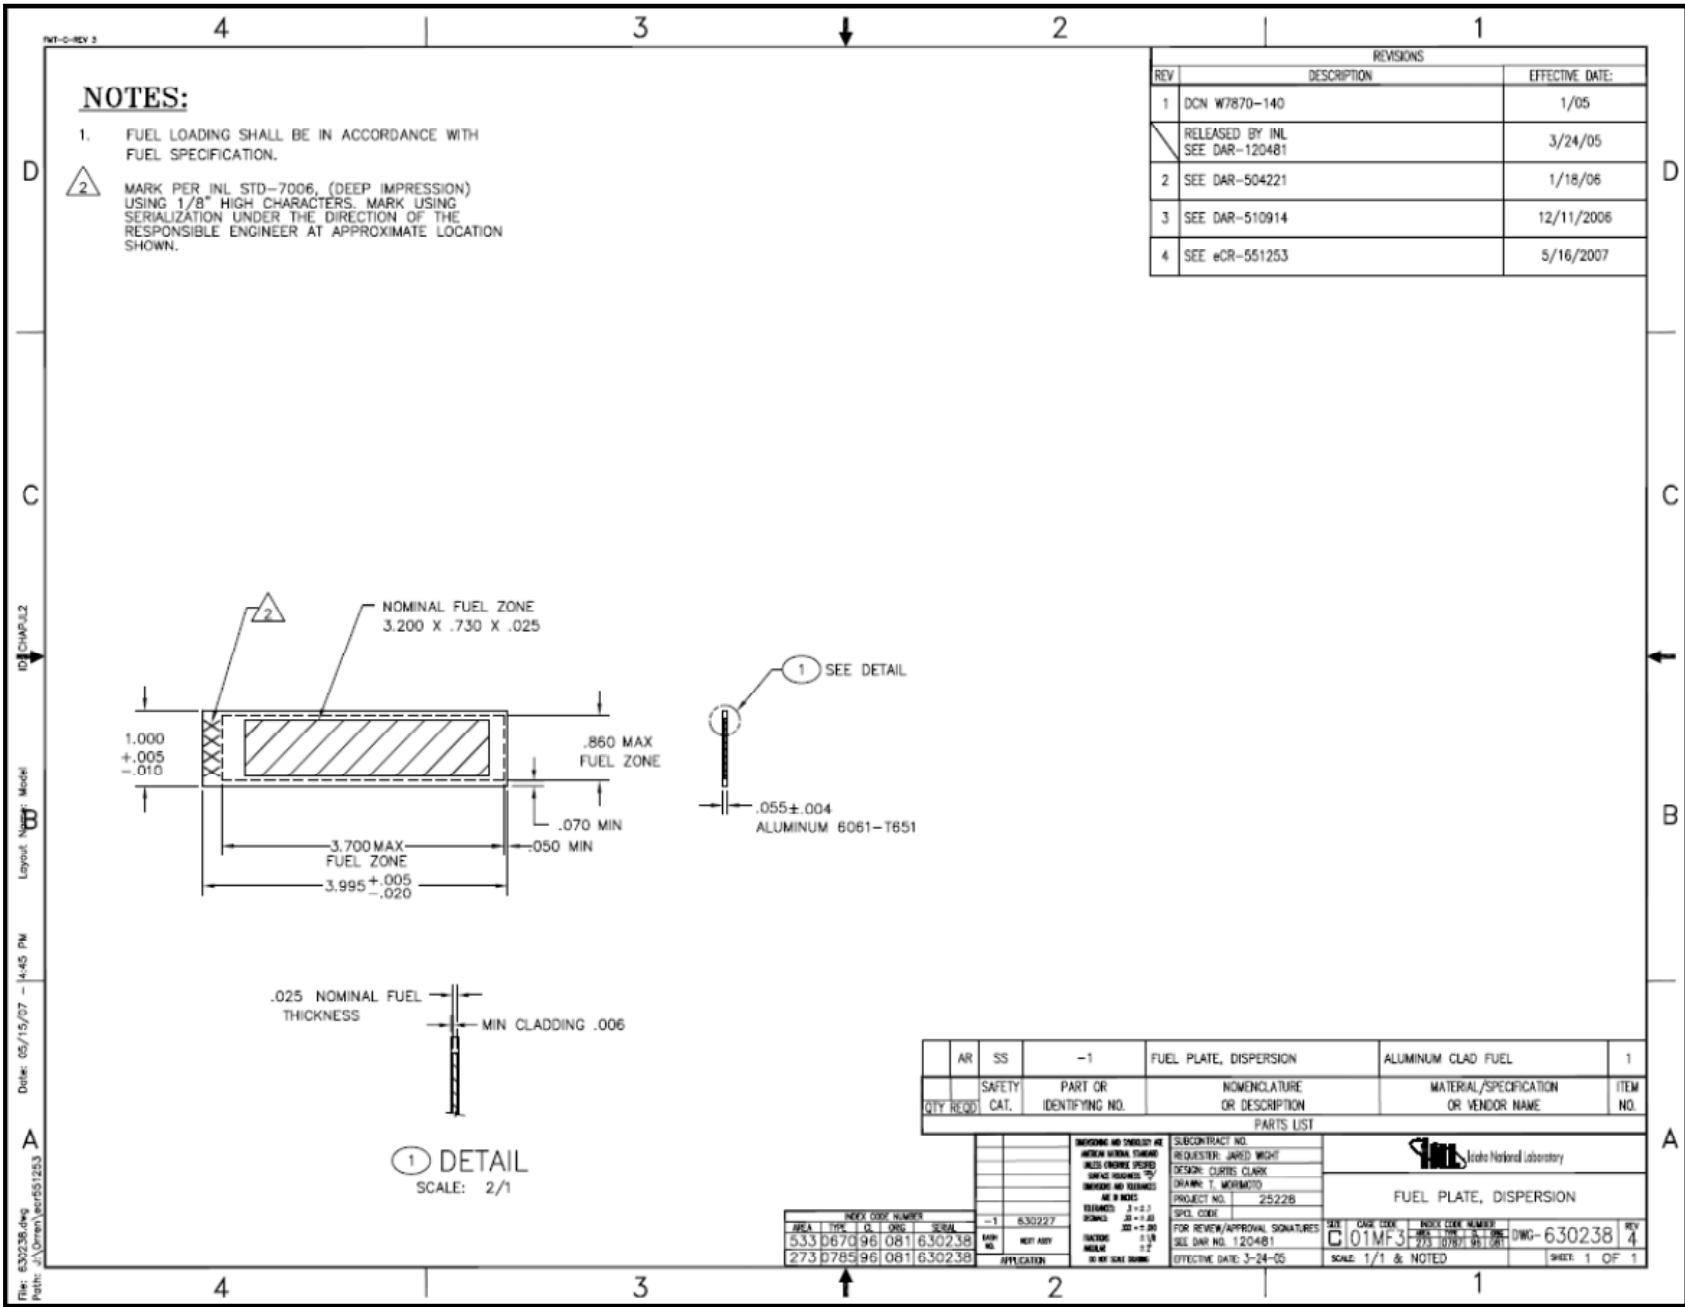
DWG-630238: RERTR dispersion fuel miniplate.
